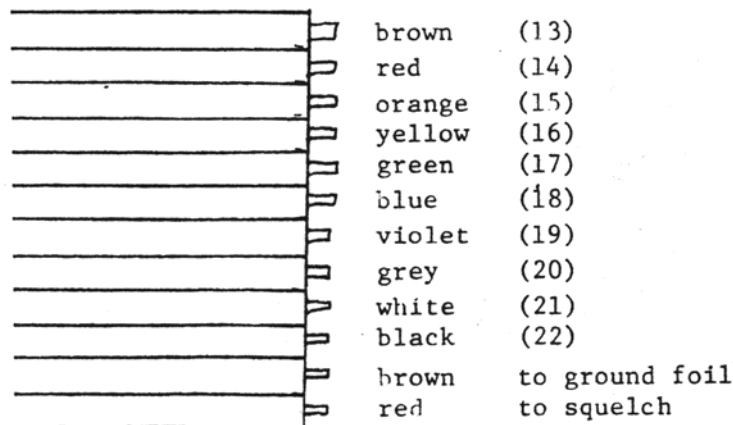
Cut, strip and tin the end of the cable as shown in the drawing. The tinned end should be approximately 1/16" long to minimize the possibility of shorts.
